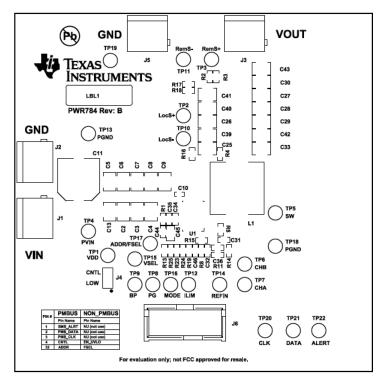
PWR-784EVM Top Layer Assembly Drawing (Top View)
